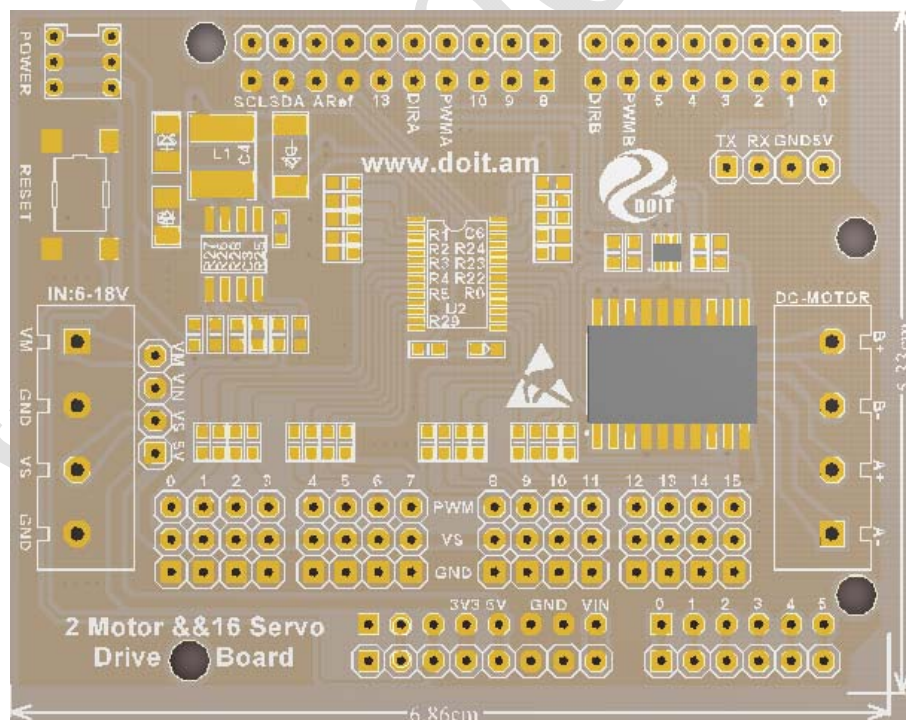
PCB view for 2Motor & 16 Servo Drive Board
